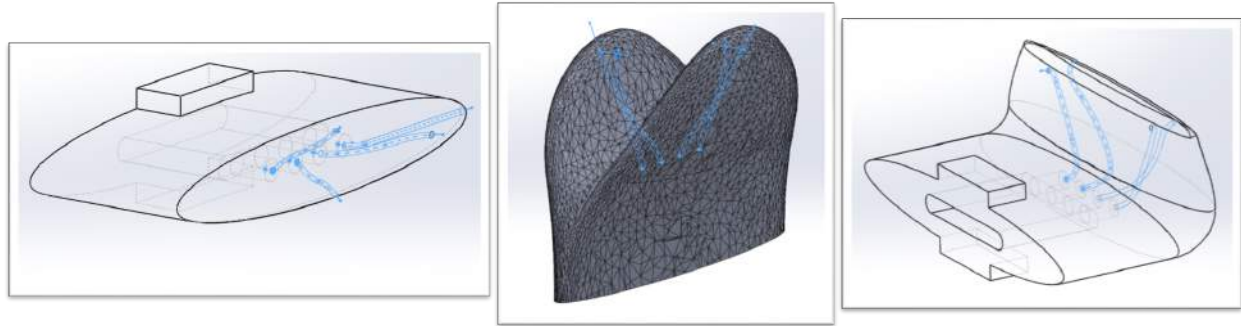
Isometric View of Final Wingtip Devices and Internal Pressure/Injection Bores. Left to Right: Reference EndCap — SplitTip Device — General Device.
